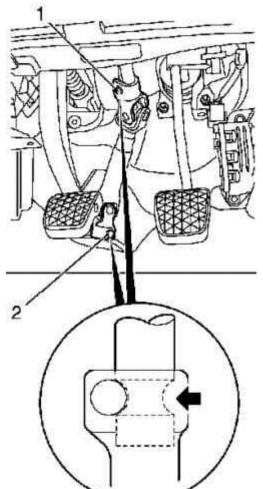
Clamping bolts, steering column: 1, 2 - clamping bolts
